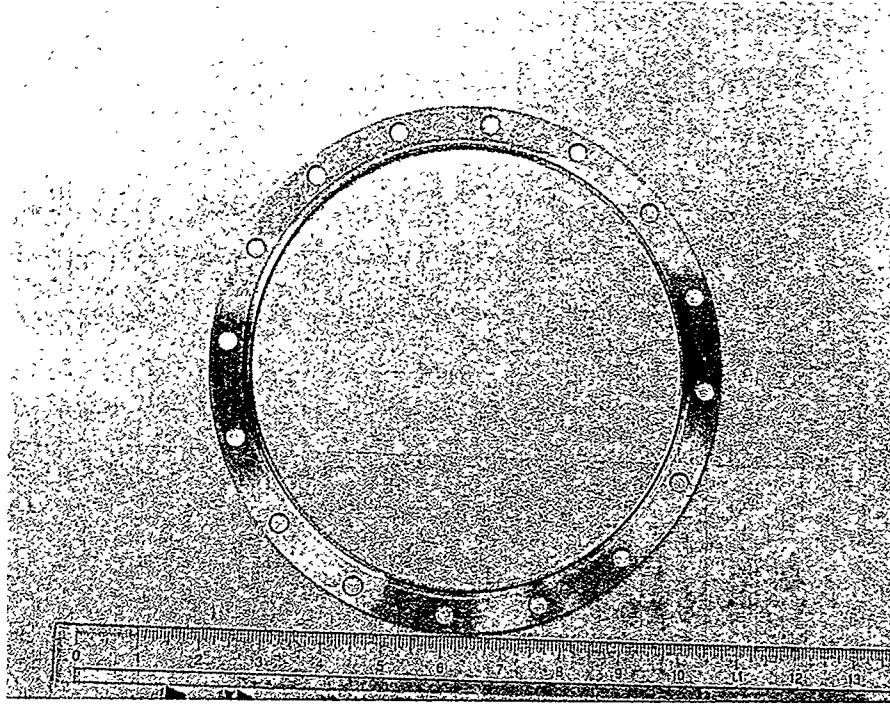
B: The copper diamond seal is ready for a vacuum test.
